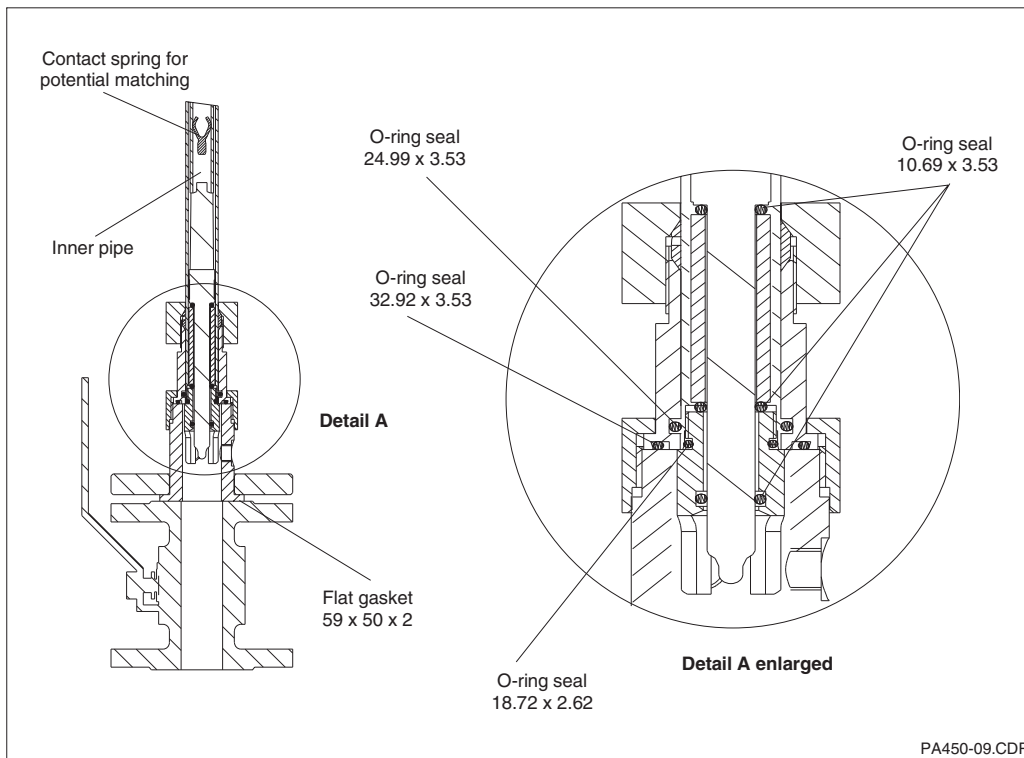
Sectional view of assembly OPA 450 showing seals
